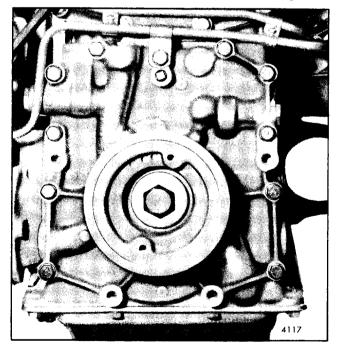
Engine Front Cover Mounting (Lower) -- In-Line Engine
